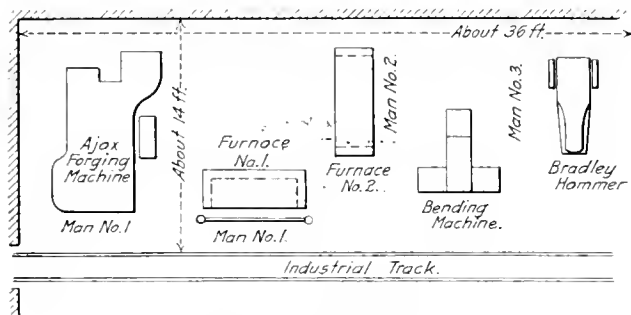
Arrangement of Machines and Furnaces for Manufacturing Brake Beam Hangers.
